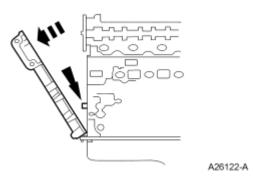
Removing Engine Front Cover Courtesy of FORD MOTOR CO.
